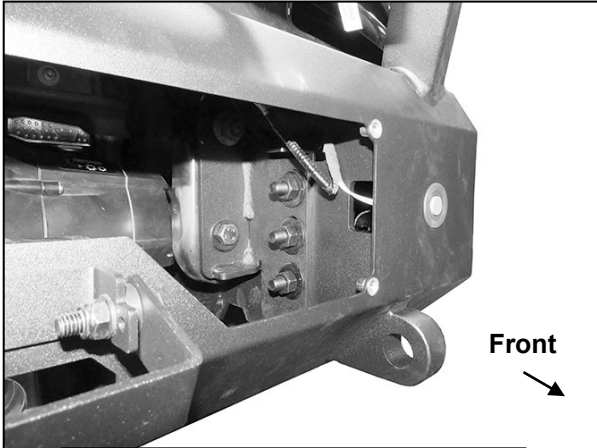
Insert Triple Bolt Plate up and through CS1 Bumper and Bracket assembly. NOTE: Bolt Plate can also be installed through front of Bumper. Driver/left side illustrated
